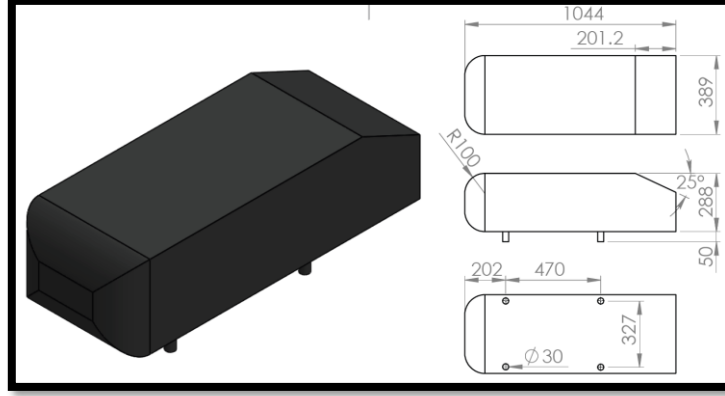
Technical sketch and dimensions of Ahmed body (baseline model), dimensions in mm (Ahmed gövdesinin teknik çizimi ve boyutları (temel model), mm cinsinden boyutlar)
